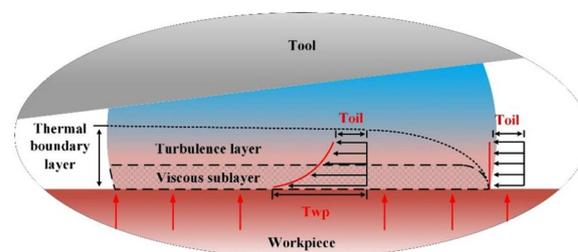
Convective heat transfer of fluid at the tool-workpiece interface
